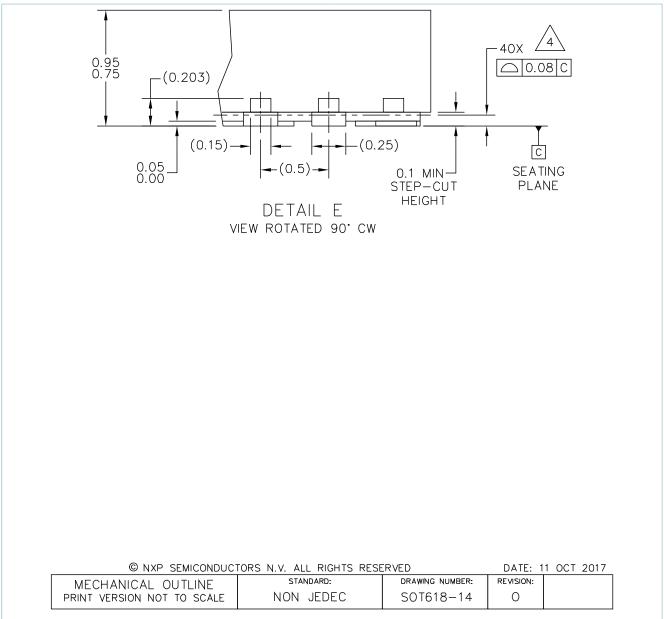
Package outline dt1 HVQFN40 (SOT618-14)
